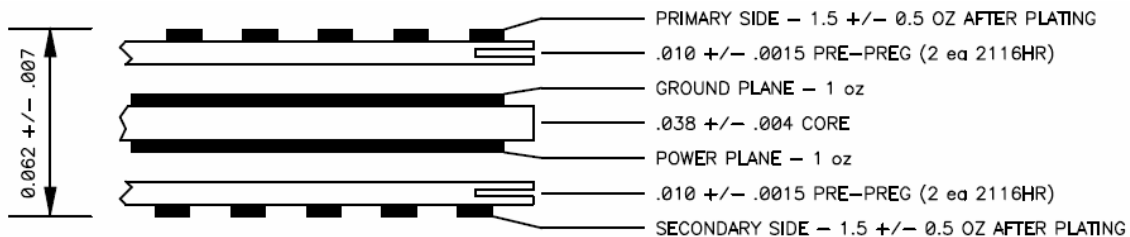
Four-Layer PCB Layer Stackup for Crystal (Side View)
